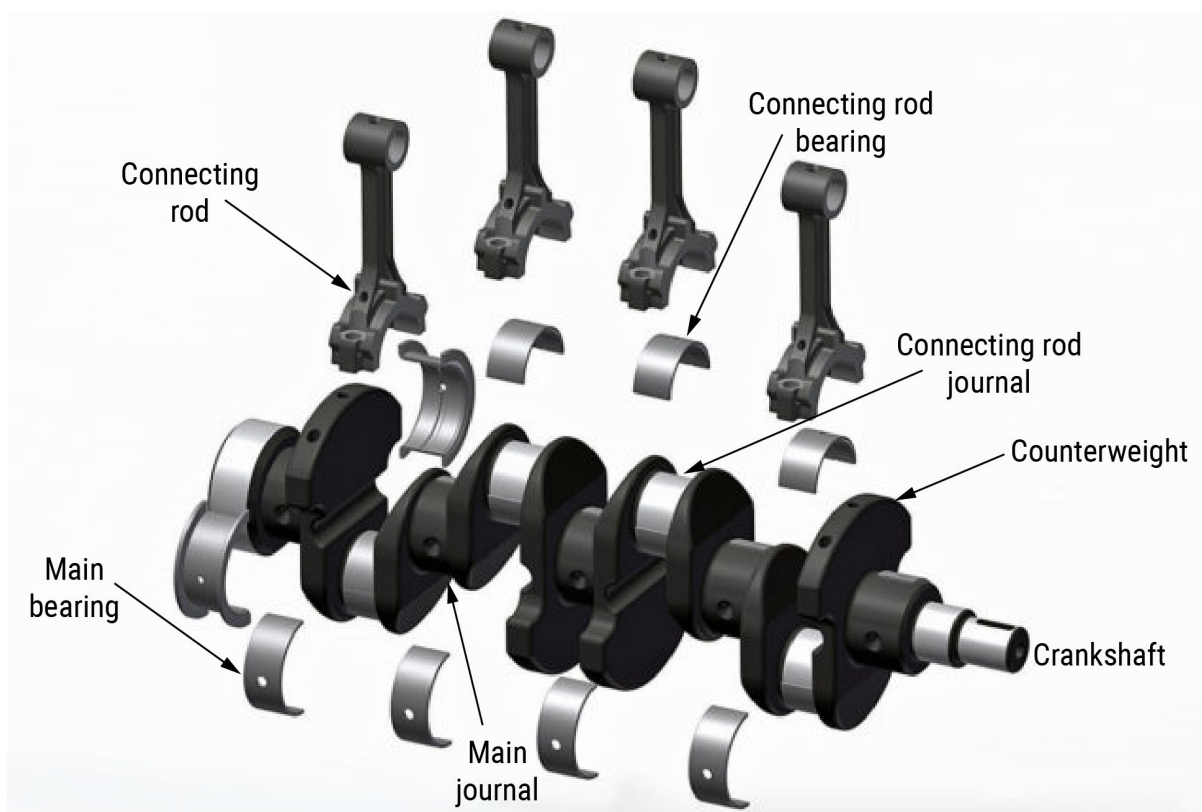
Typical components of a diesel engine crankshaft (not a Caterpillar 3516B). (Background source: enginelabs.com)
